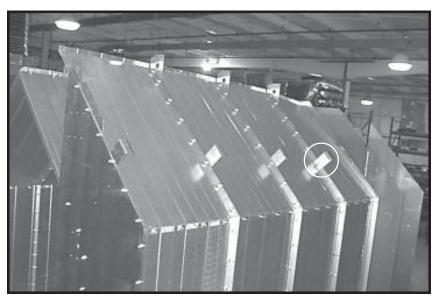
Brackets and outside screen installed in LH side of dryer. Note (2) walk rail brackets (circled in photo), one on each side of seam above frame tie channels.
